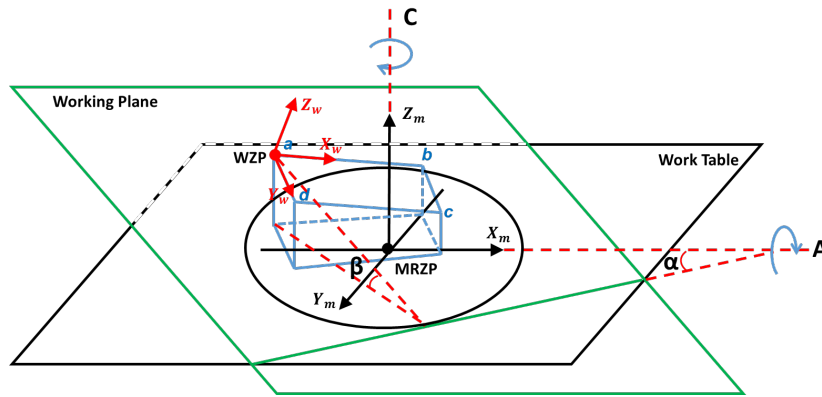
Illustration of a clamped part on a rotary table of CNC machine
